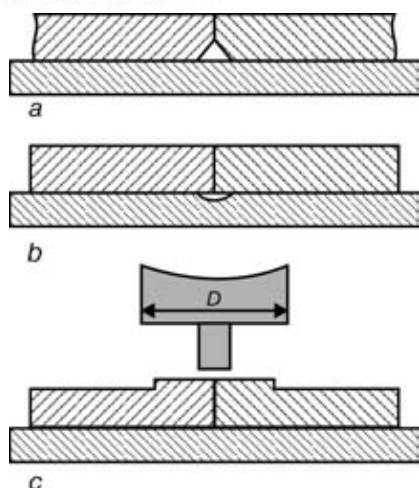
Preparation of edges to be welded with a root part bevel (a), making a groove in the substrate (b) and a local thickening in the welding zone (c)
